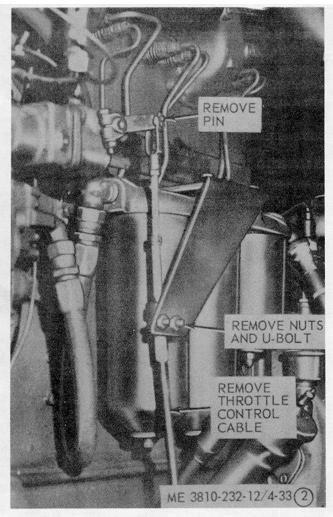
Crane engine throttle control assembly rem oval and installation. Sheet 2 of 2.
